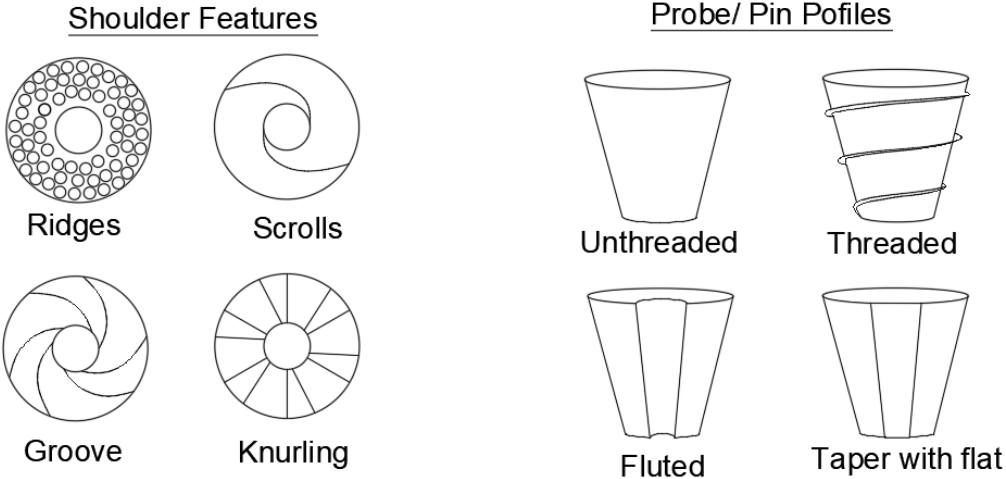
Shoulder features and tool probe profiles for tapered pin[21]
